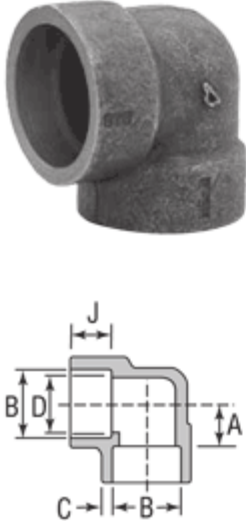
90° Elbows		Size		A Nominal		B Socket Dia.		C Minimum		D Bore Dia.		J Socket Depth Minimum		Unit Weight
